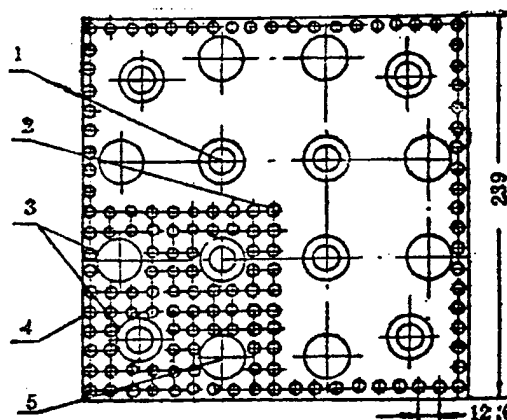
Schematic Diagram of AC-600 Fuel Assembly.
